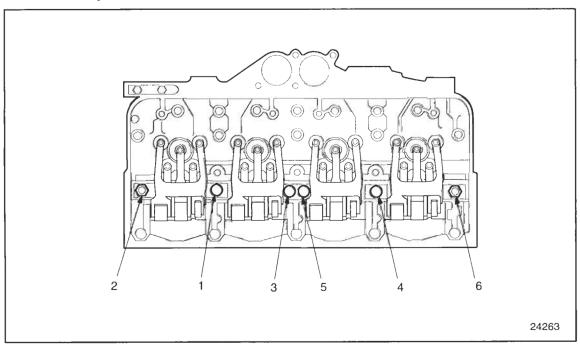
Rocker Arm Shaft Bolt and Nut Torque Sequence
